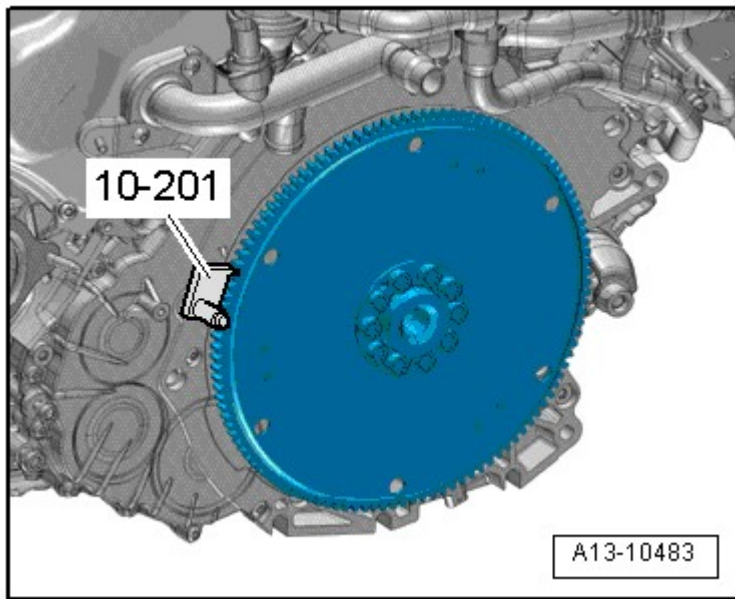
Identifying Drive Plate & Counter Hold Tool 10 - 201
